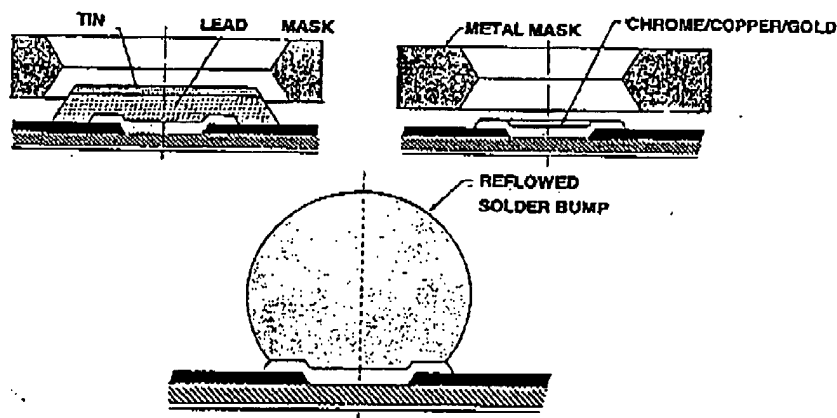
Fabrication of solder bumps for C4 technology.<sup>15</sup> © ISHM 1974.
